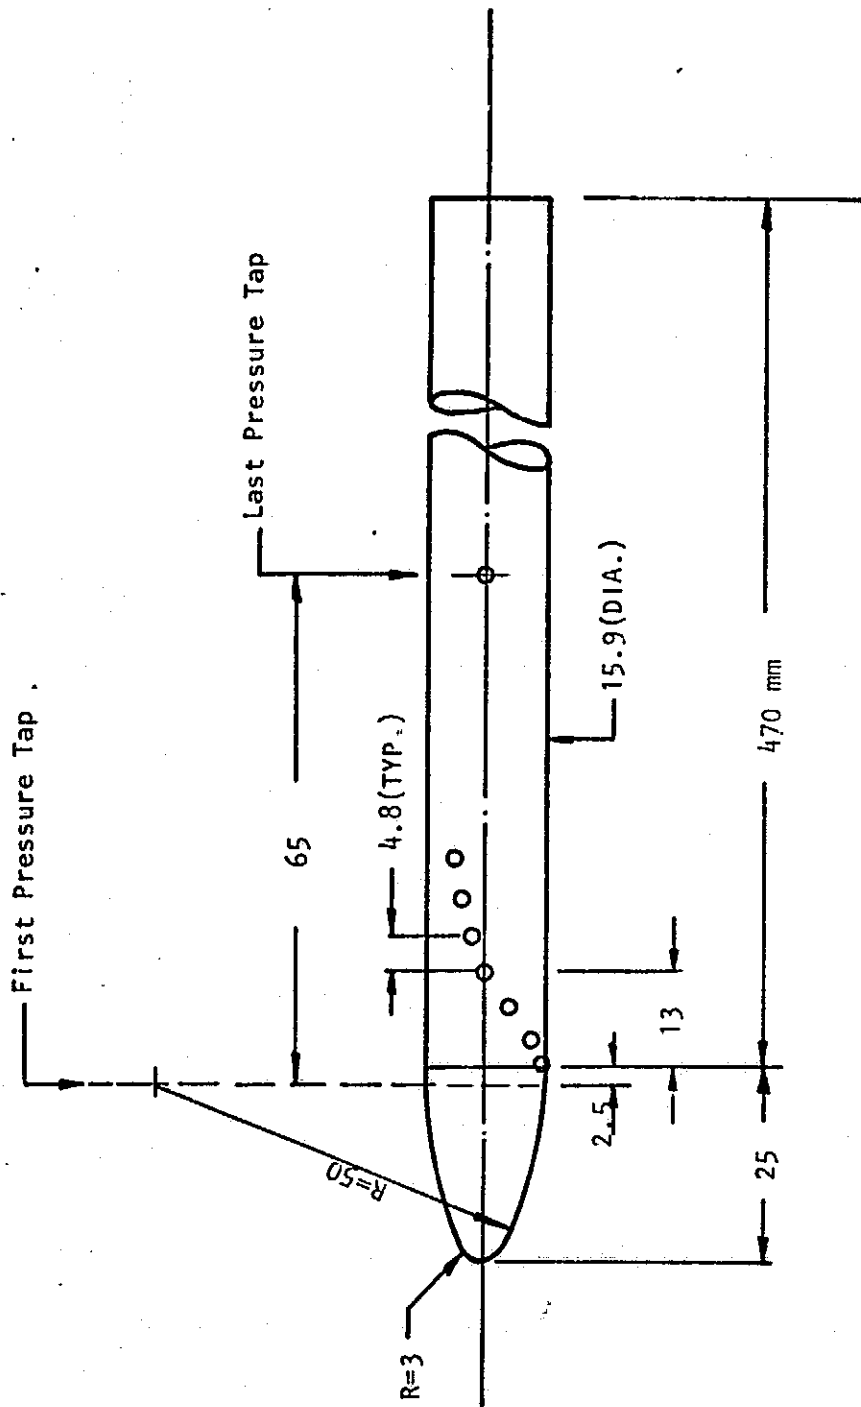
MODEL DETAILS (DIMENSIONS IN MILLIMETERS)
